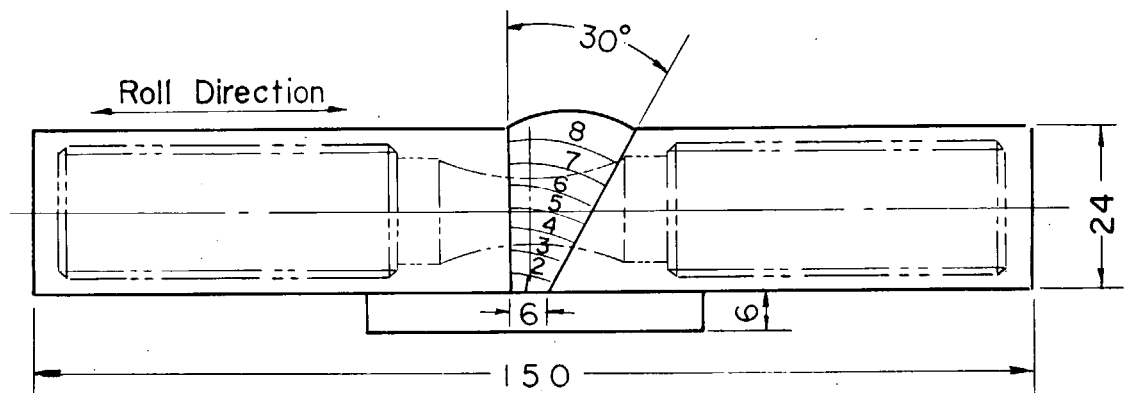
Joint Design and Location of Weld-Metal Specimen(Code W)
